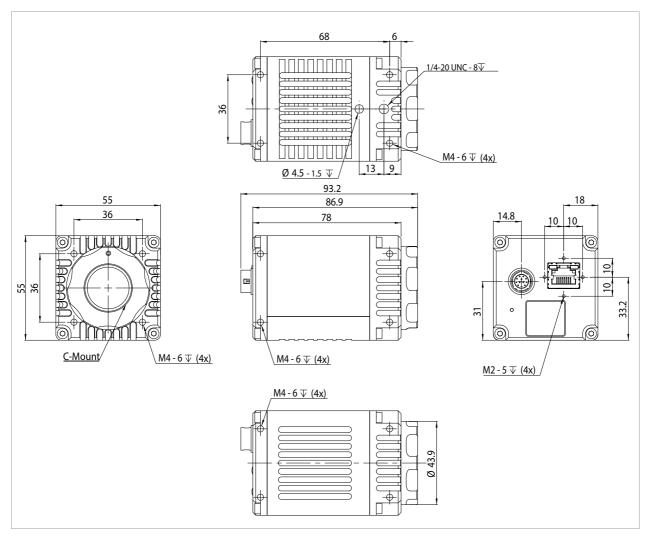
Goldeye G, dimensions with C-Mount lens adapter
